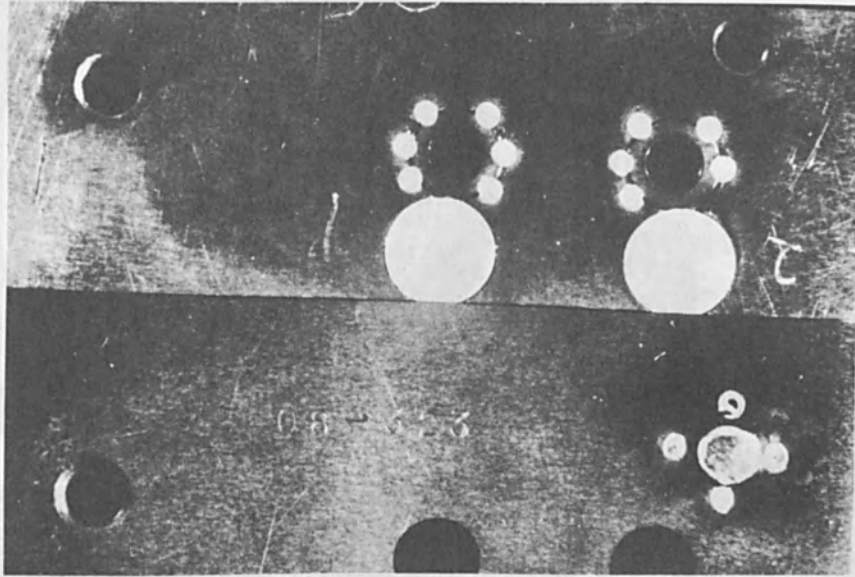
Portion of mold cavity has drill bushings EB-staked in place to correct out-of-tolerance holes.
